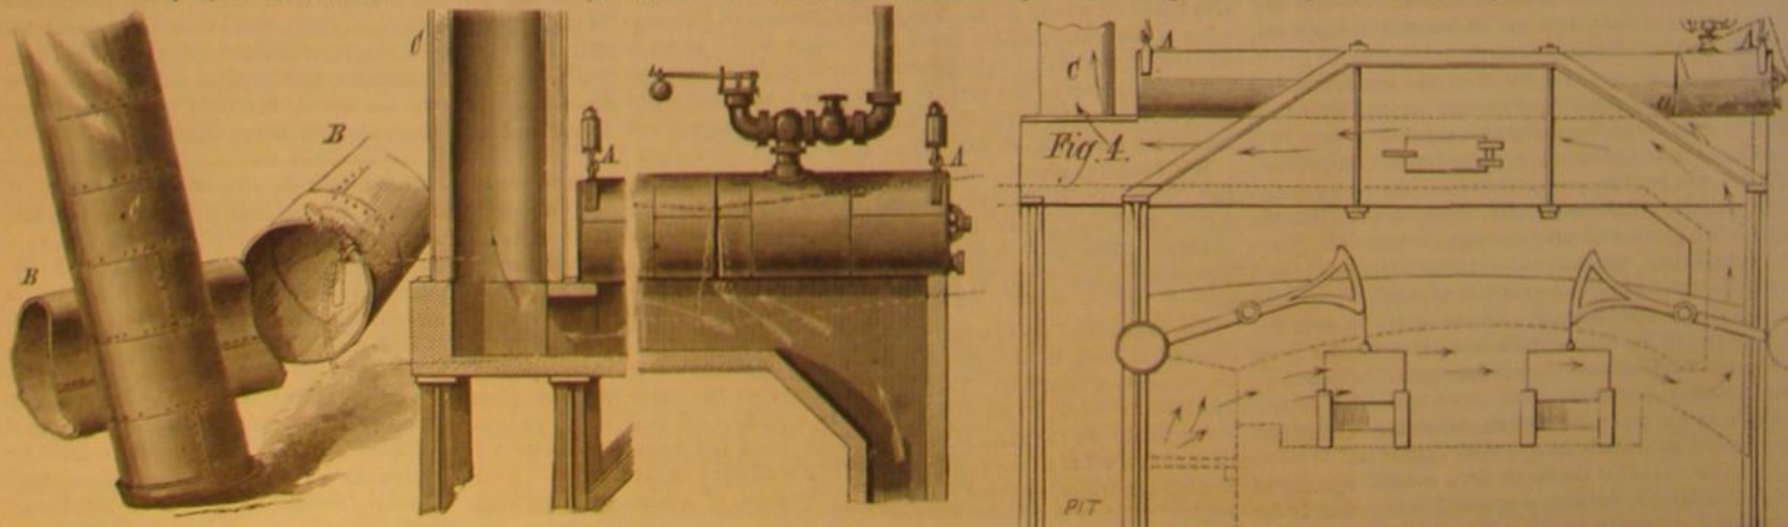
BOILER EXPLOSION IN POTTSVILLE PA.—SIDE ELEVATION, SHOWING COURSE OF FLAME AND HOT GASES.
